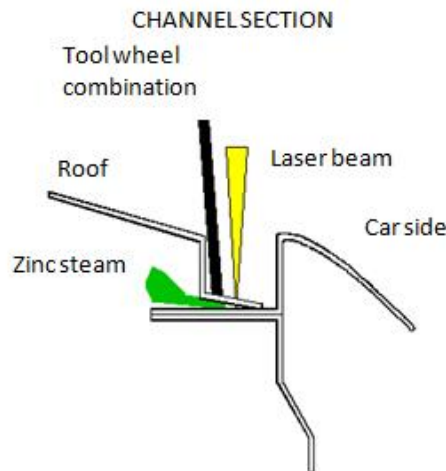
zinc steam pouring out during the zinc-covered steel welding
